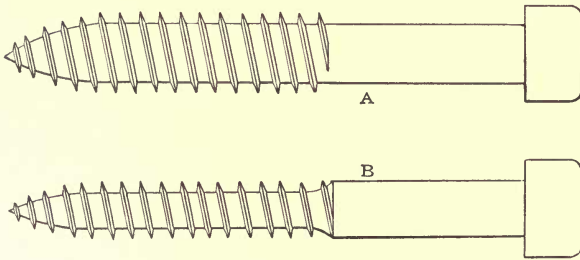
ROLLED-THREAD LAG-SCREWS.
